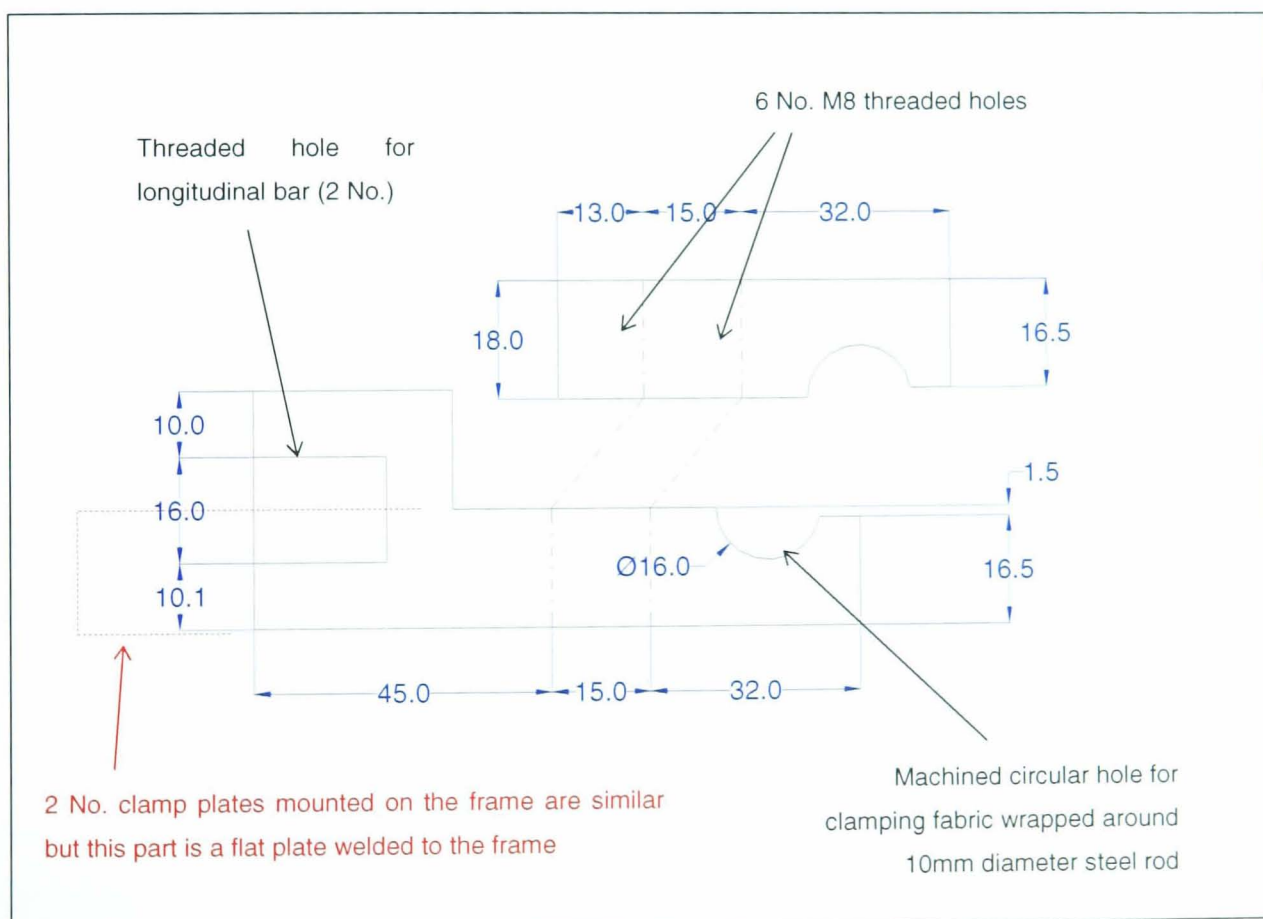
Section through clamp plate mounted on longitudinal bars
